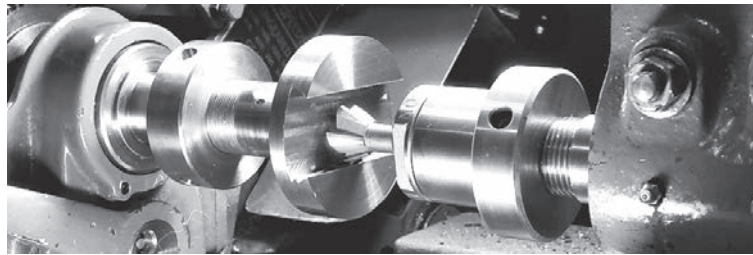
Cutting the dovetail slide using a motorised cross-slide milling attachment. It is a far from rigid set-up, but with careful cuts and a little hand-fitting (scraping) a very good sliding fit can be achieved
